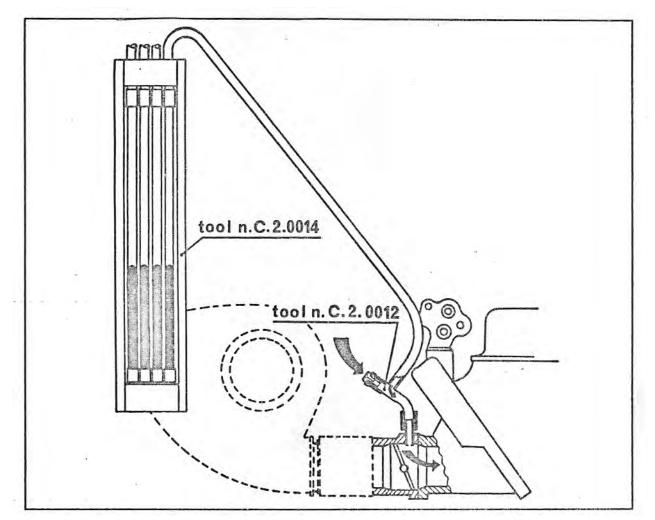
THROTTLES ALIGNMENT CHECKING
